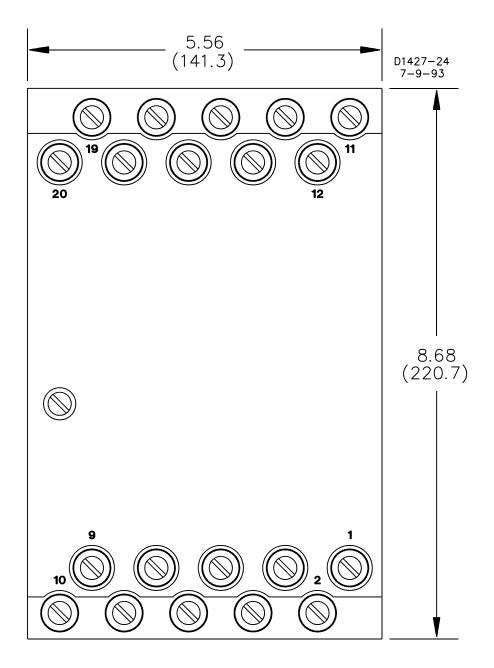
S1 Case, Double-Ended, Semi-Flush Mounting, Outline Dimensions, Rear View
